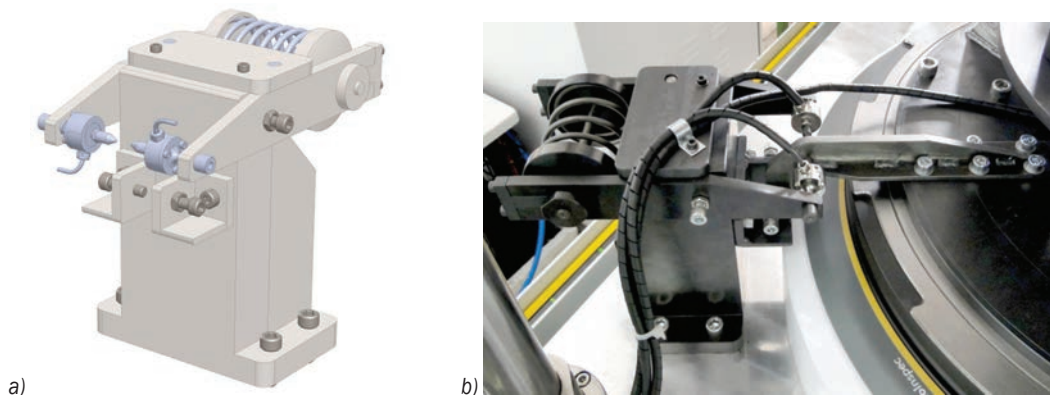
a) Model of the torque measuring unit, and b) measurement of the friction torque
